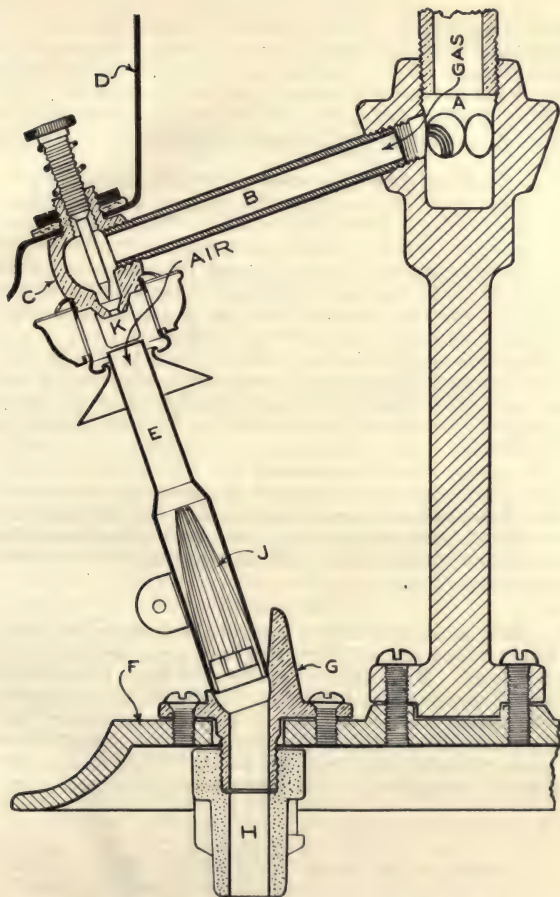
Five-Burner Outdoor Arc Lamp—Details of Burner, page 835.
